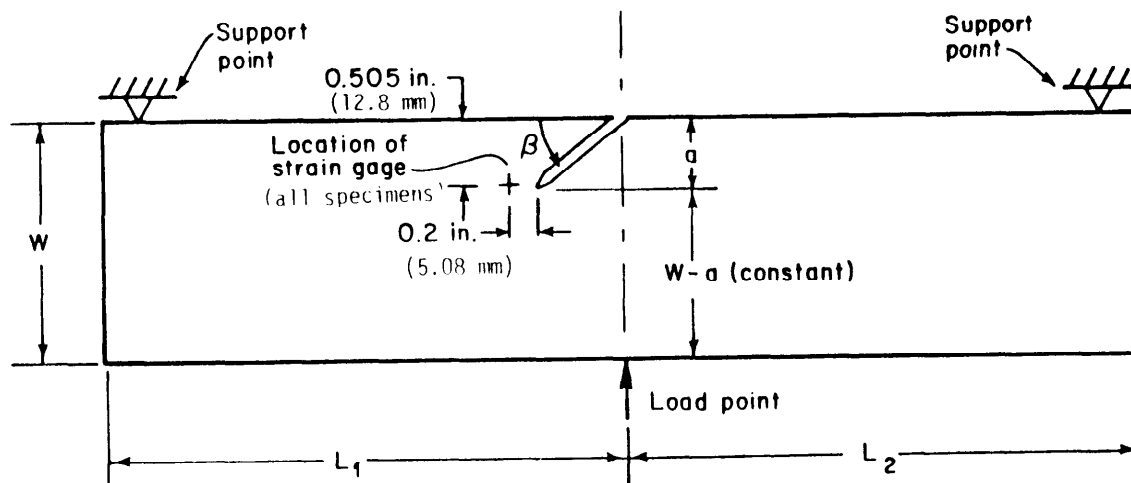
THREE-POINT-BEND SPECIMEN WITH A SLANT EDGE CRACK
